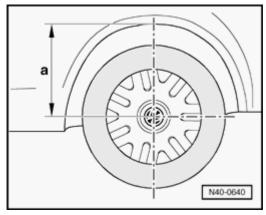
Measuring Dimension From Center Of Wheel To Lower Edge Of Wheelhousing Courtesy of VOLKSWAGEN UNITED STATES, INC.
